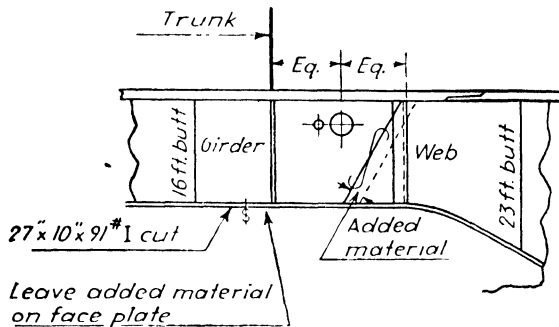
Web frame set at proper half-width of the ship and connected to a transverse girder.
